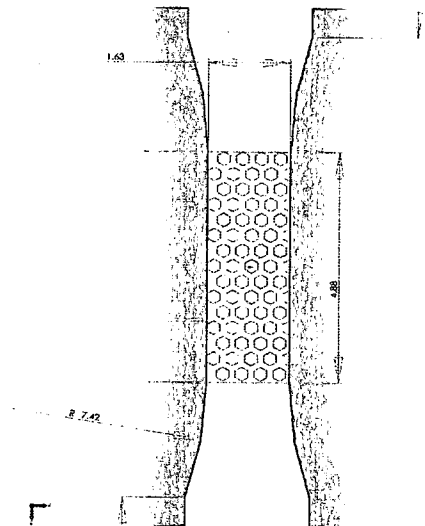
Printed template of the 1/4 inch cell with 1/8 inch walls Tensile Specimen
